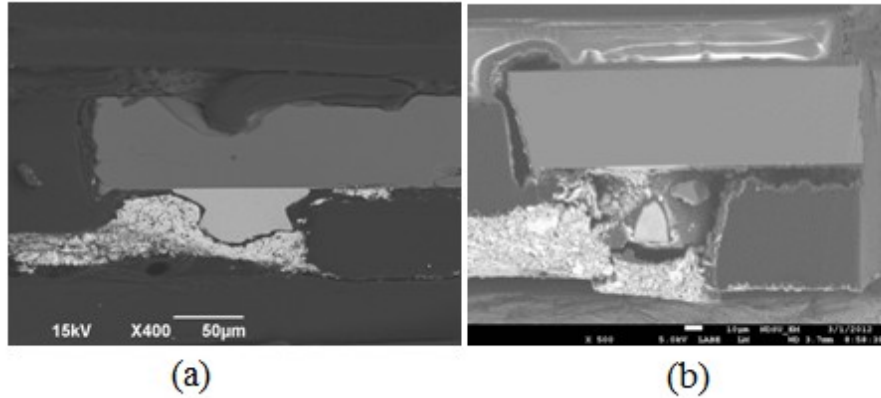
Cross-section of (a) good and (b) bad bumped die package
